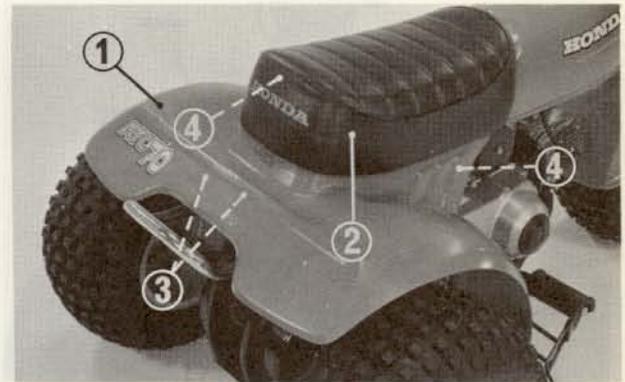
(1) Rear fender (2) Seat (3) Nuts (4) Bolts
